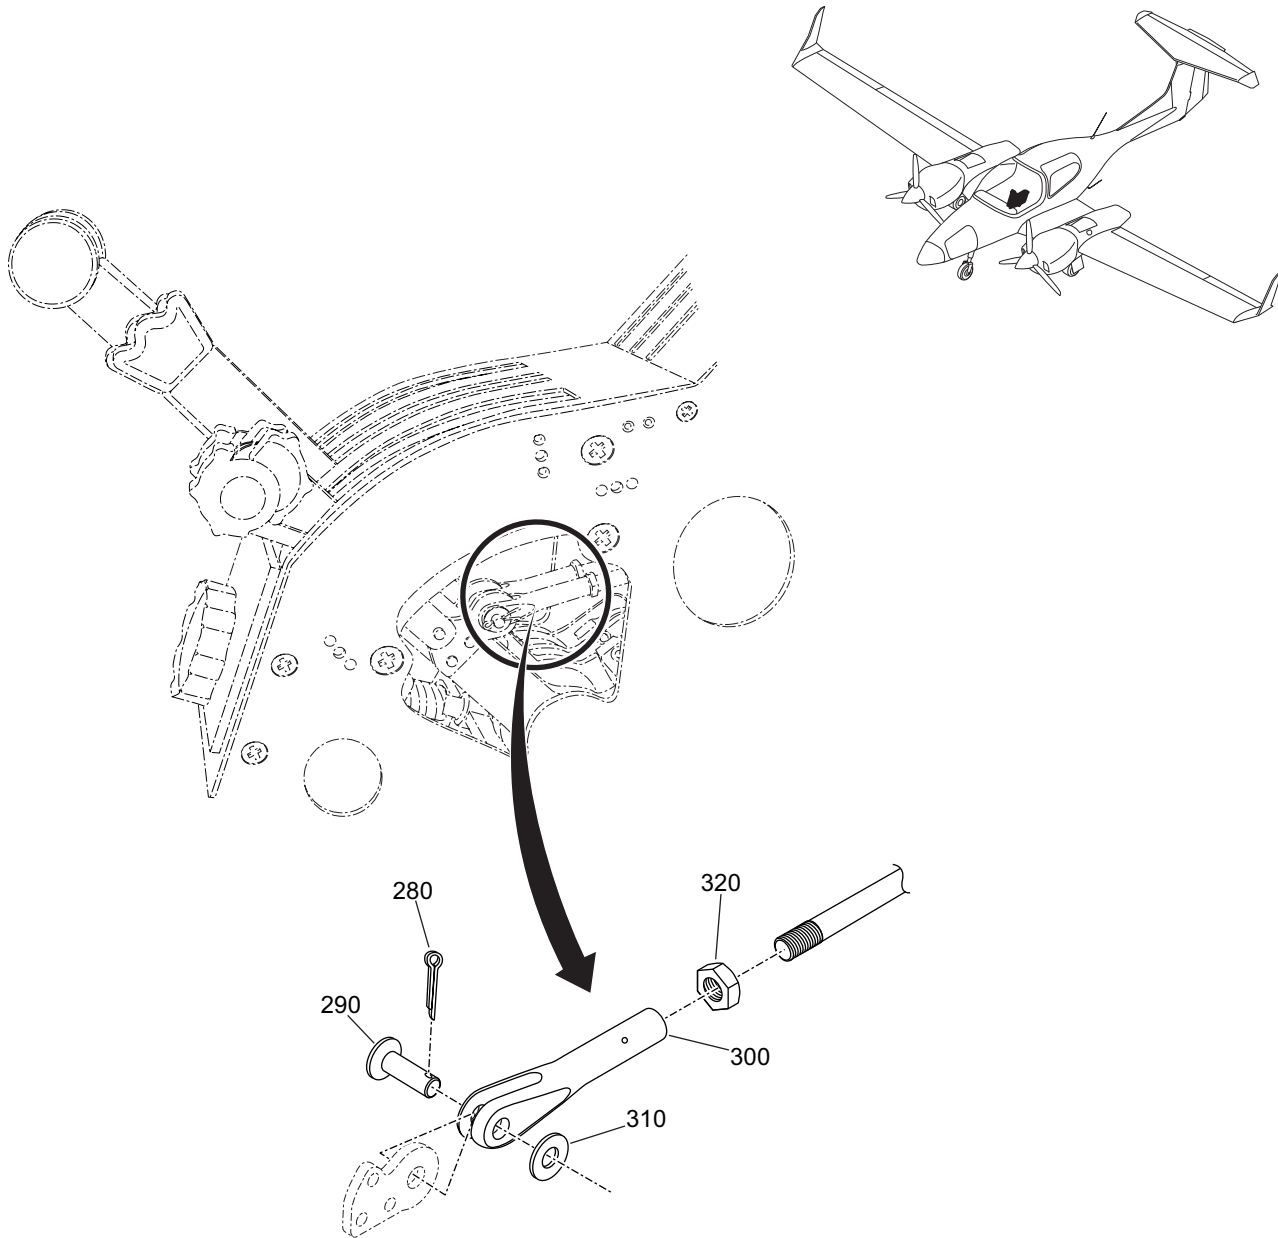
Mixture Control Assembly (Sheet 4 of 4)
